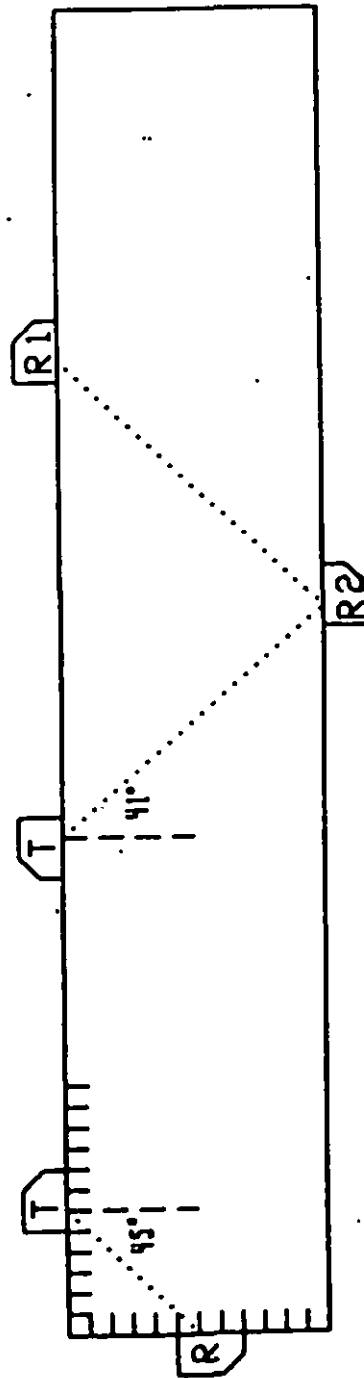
Shear wave pitch-catch inspection technique for large bar, rod and forgings.
